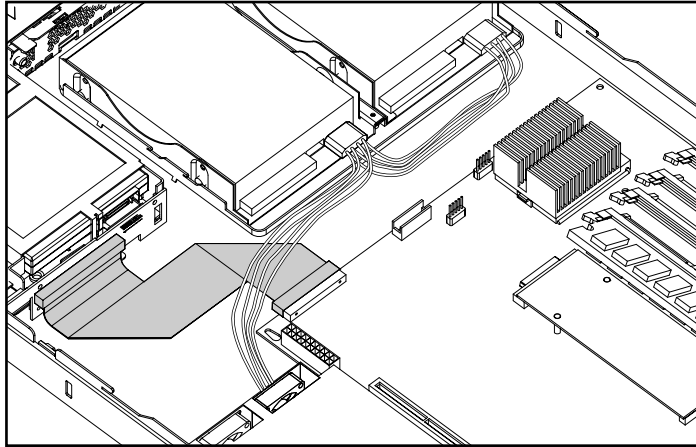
Cable routing from the CD-ROM/diskette drive assembly backplane to the system board (center wall, PCI riser board assembly and hard drive cables removed for clarity)
